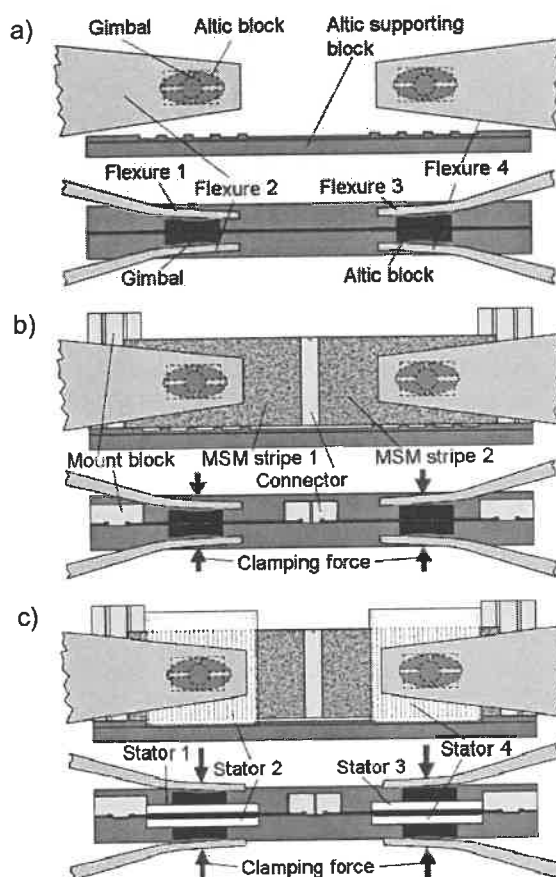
Assembly sequences: a) initial state, b) mounting of traveler and c) mounting of stators
